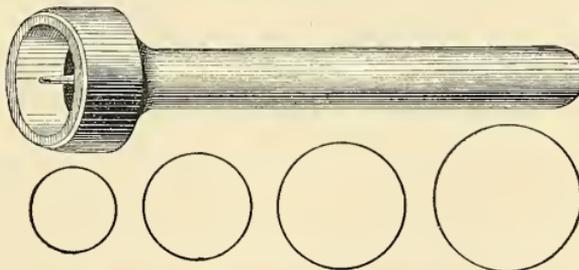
Centre-punch for cutting Paper Polishing-wheels (Stevens).
